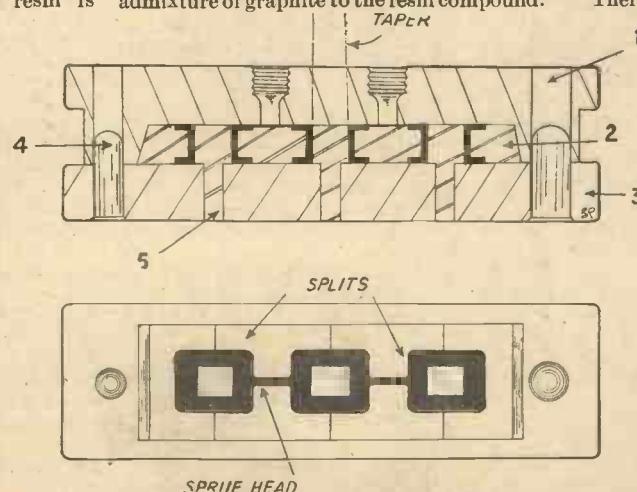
A small injection mould for coil formers of the type seen in Fig. 2.
